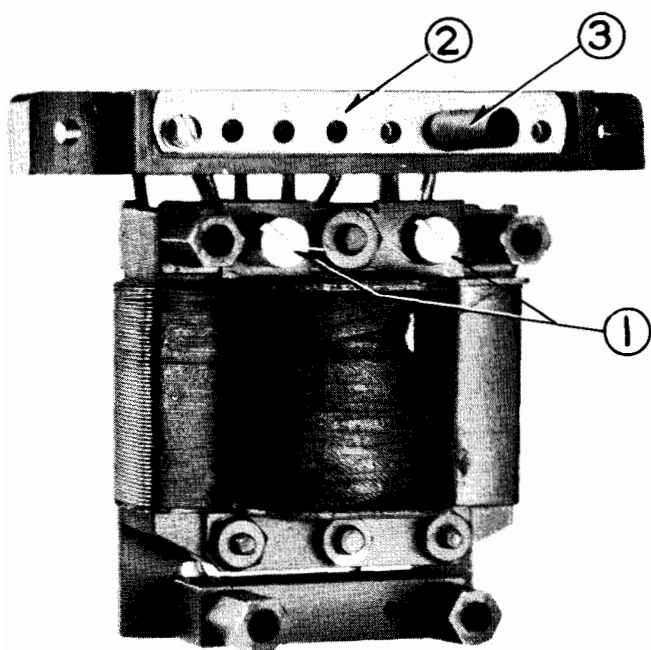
"E" Type Electromagnet. 1- Magnetic Plugs. 2-Tap Block. 3-Tap Screw.
